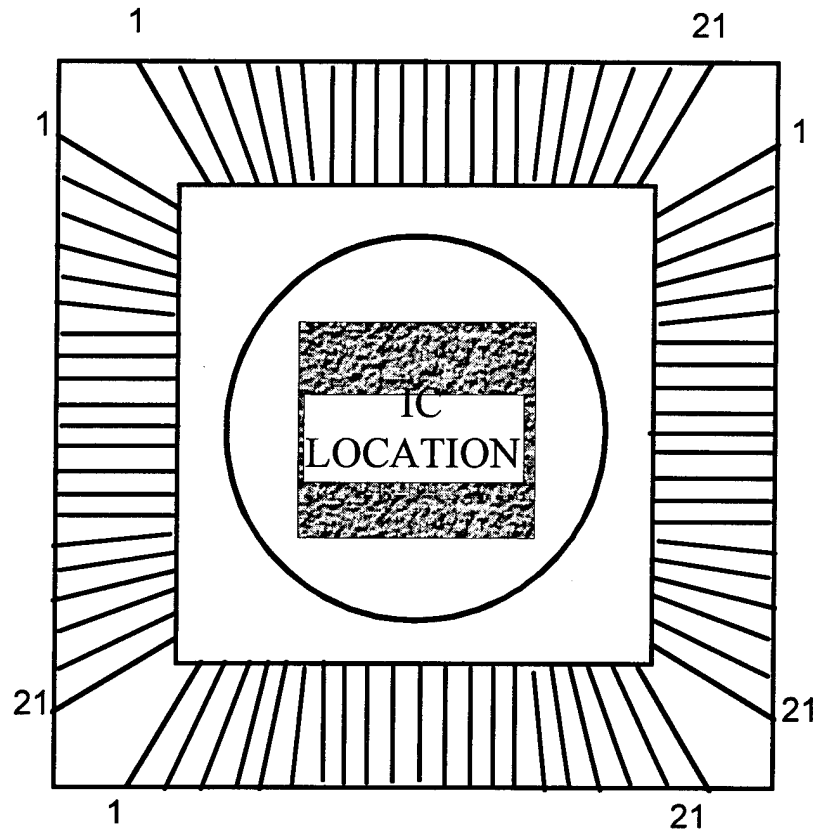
Schematic of 84 pin leadless chip carrier package with hole drilled in IC cavity. The hole, indicated by the circle, is 1 cm in diameter, which is sufficiently large for the IC to fit inside.
